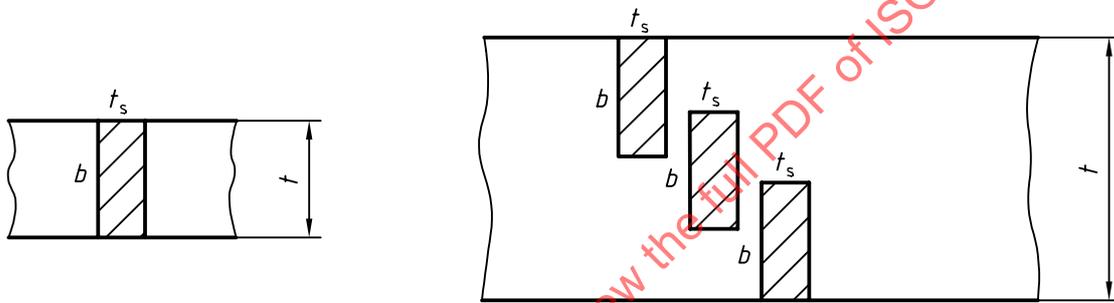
Side bend test specimens for a butt weld (SBB)
